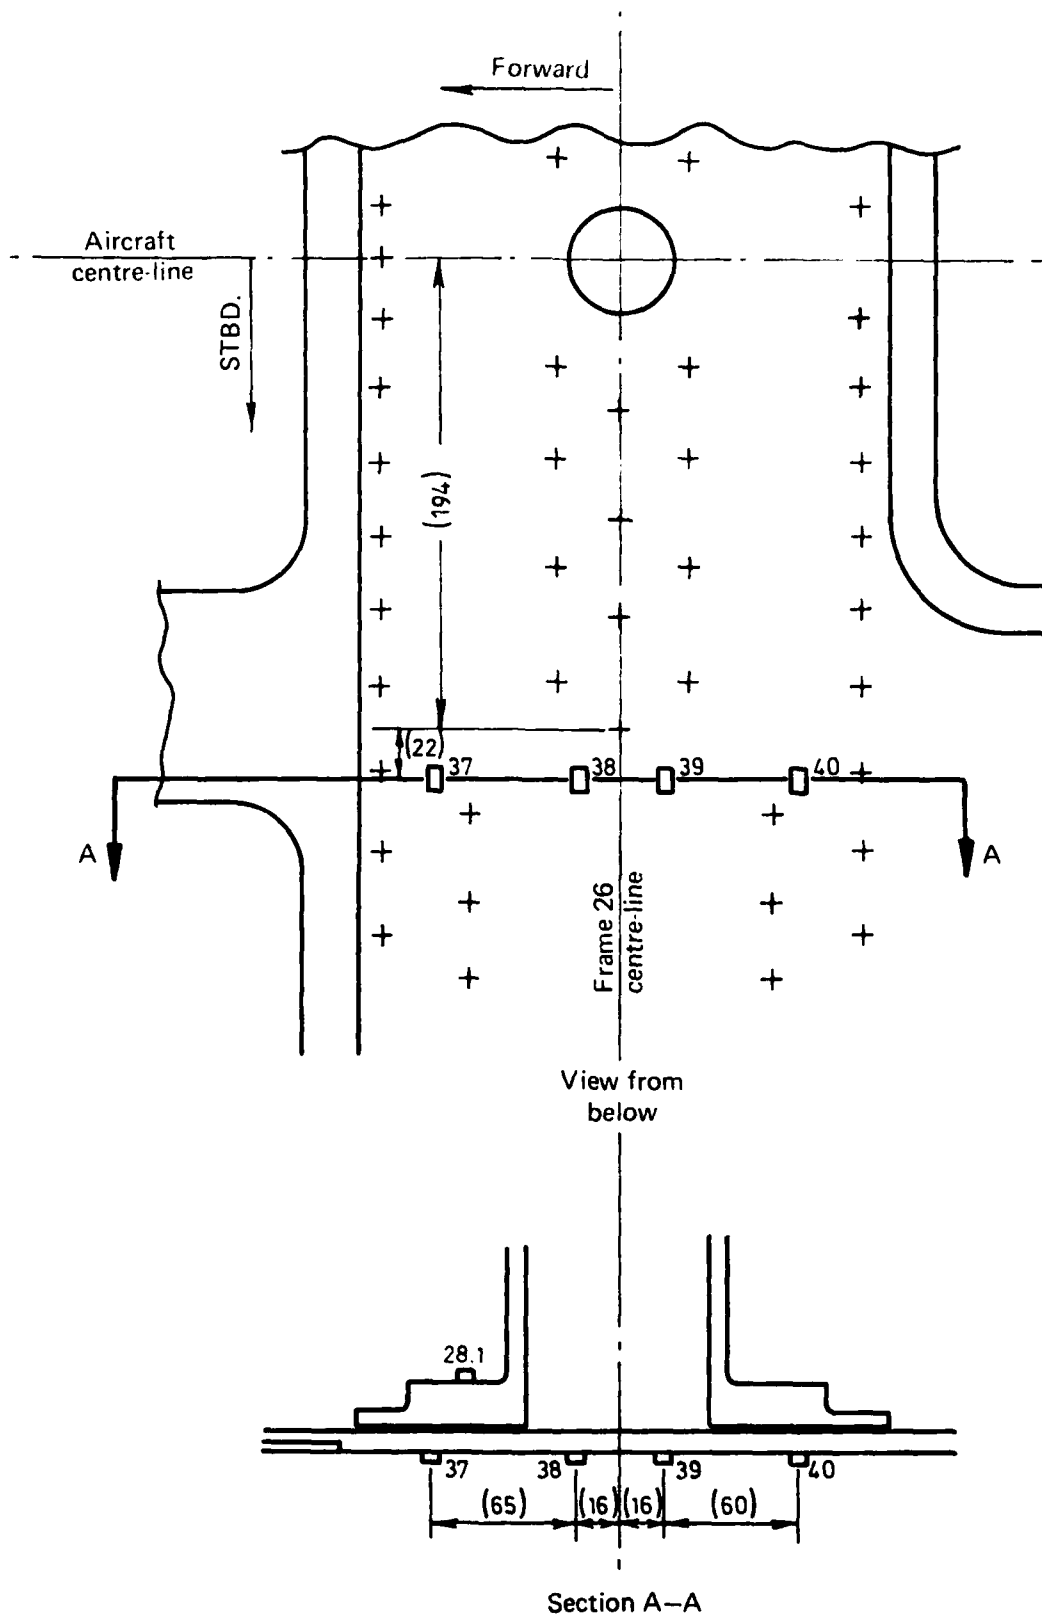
LOCATIONS OF LOWER STRAP GAUGES
